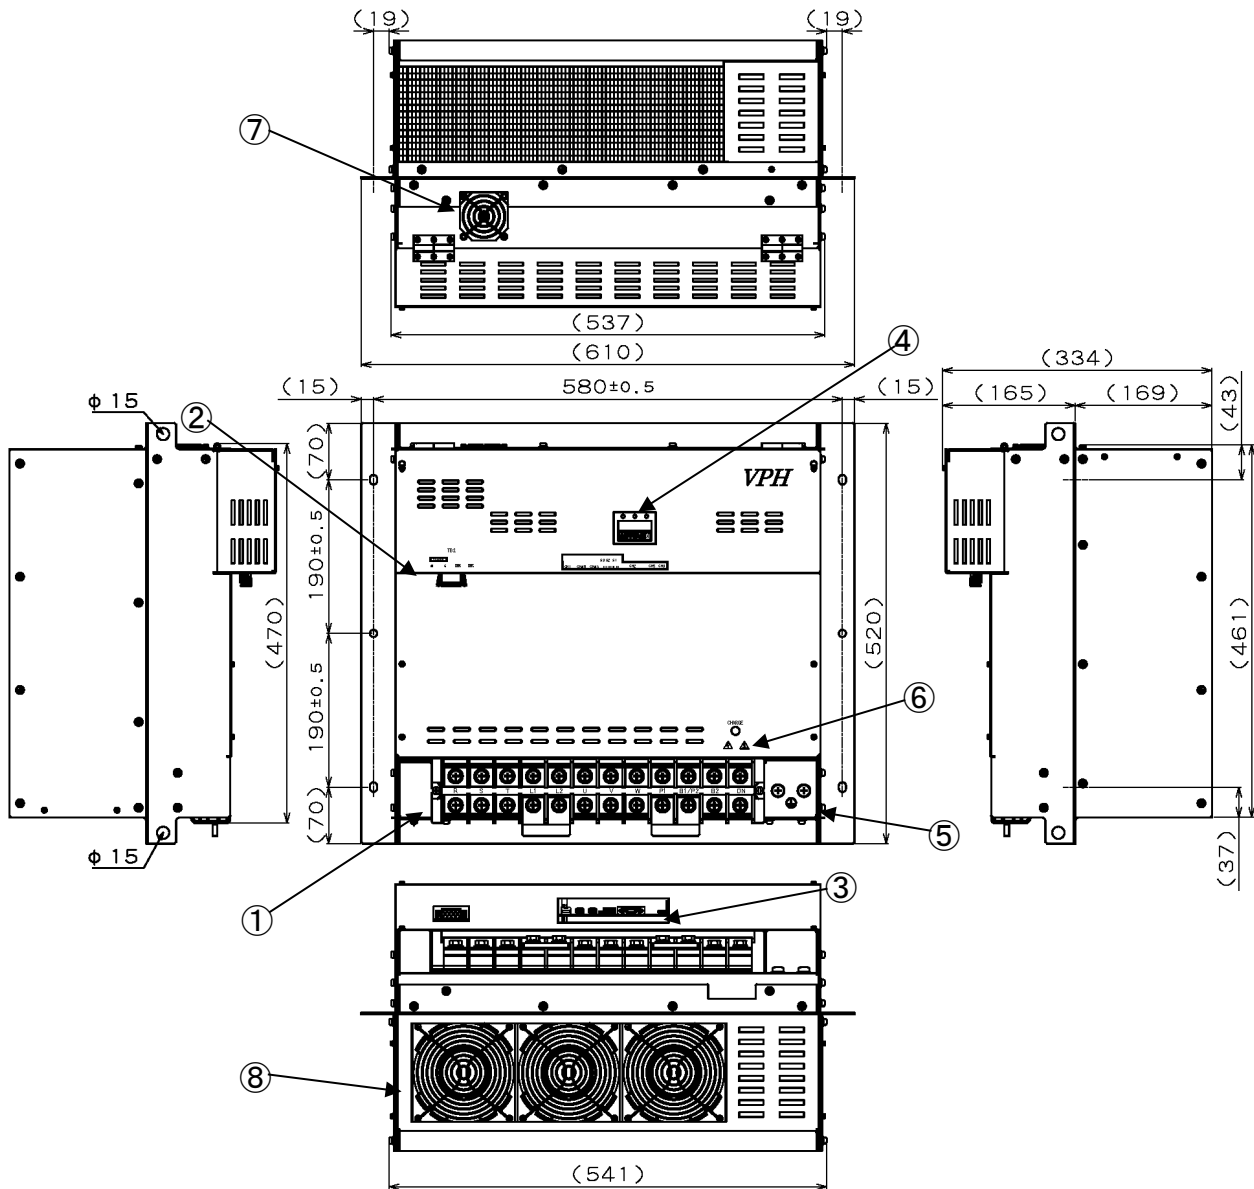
Outline drawing of the main unit of the device with 75 kW (Type 3)
